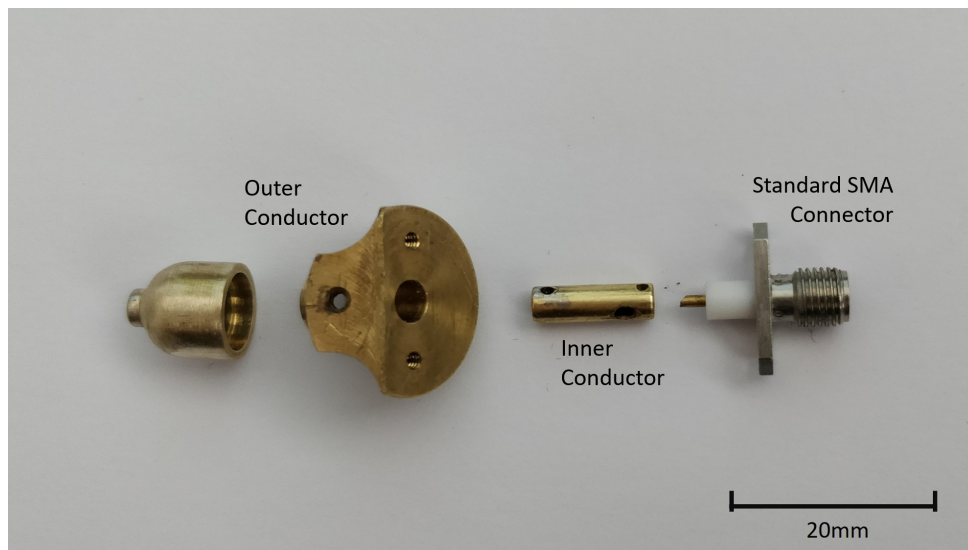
Photograph of the various parts which make up the co-axial transformer.
